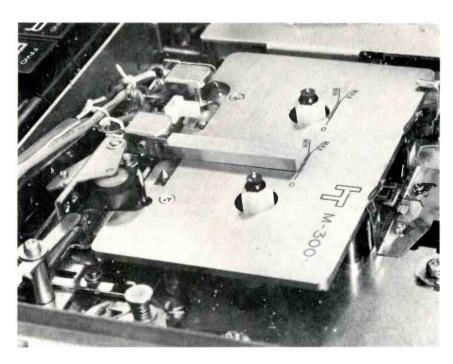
The metal gauge finger on the mechanical alignment fixture serves two purposes. It checks head guide alignment by sliding between the head guides when correctly aligned. Secondly, it checks head penetration, indicating proper penetration on the lines scribed on the surface of the plate.
